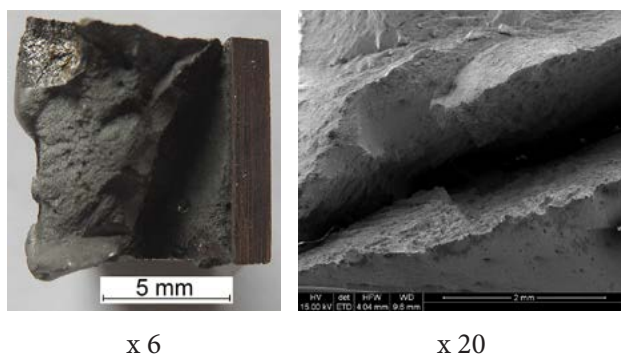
Macrophotography of the fracture of specimen GS-1 with a crack
